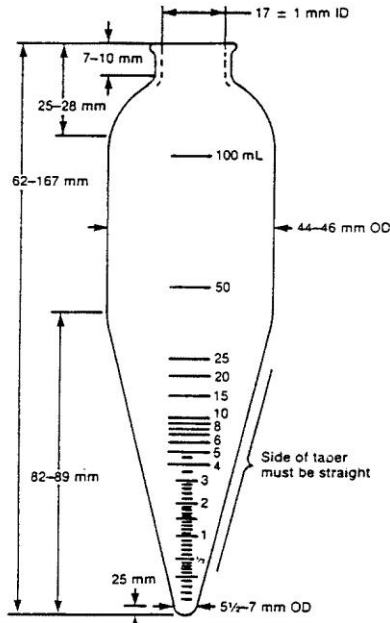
Cone-Shaped Centrifuge Tube, 167 mm (6 in.)
